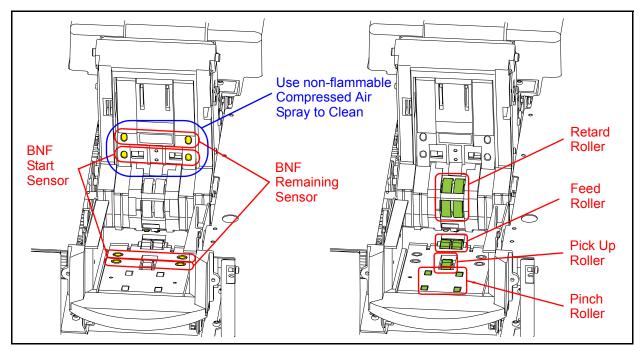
BNF Assembly Sensor/Roller Cleaning Locations
